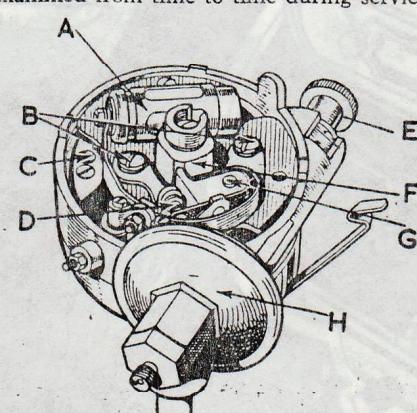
Distributor details : A, condenser ; B, contact plate securing screws ; C, lubricator ; D, contacts ; E, knurled knob for micrometer adjustment ; F, cam ; G, contact breaker pivot ; H, diaphragm housing.
